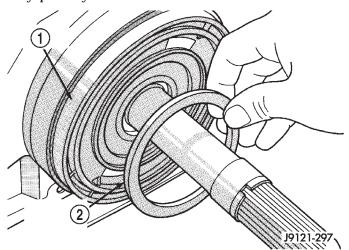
Overdrive Piston Thrust Plate Removal/ Installation
